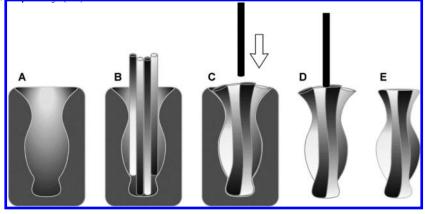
Fuse-casting of glass objects: (A) production of black mold; (B) glass pieces added, heated to fuse and fill mold; (C) metal rod inserted; (D) mold removed; (E) piece ground and polished to finish. [adapted from reference (58) with kind permission from Springer Science and Business Media].
